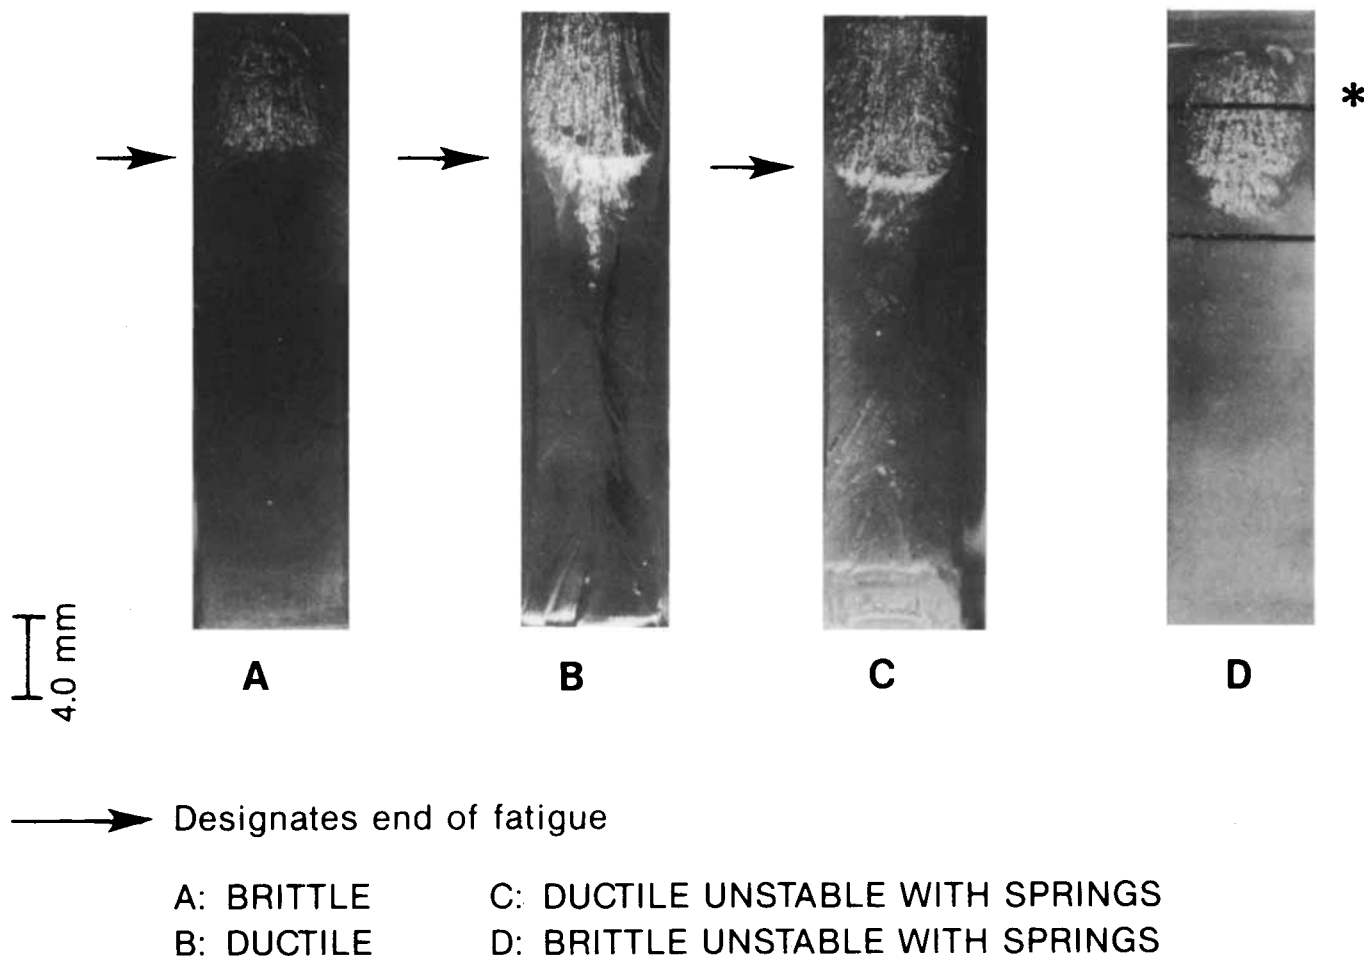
Polycarbonate fracture surfaces at 25°C.
